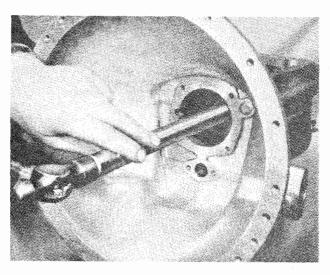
Driving Mainshaft to rear with Tool No. 20SM1 to free Centre Main Bearing.
